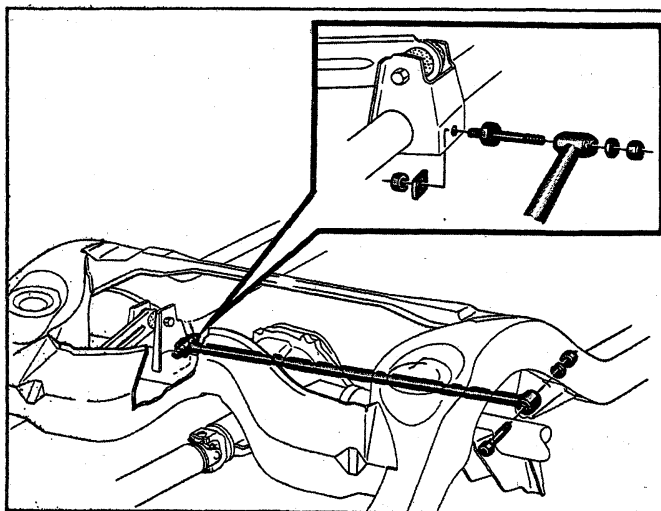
Rear Suspension Tie Rod Attaching Points (Chevrolet)
